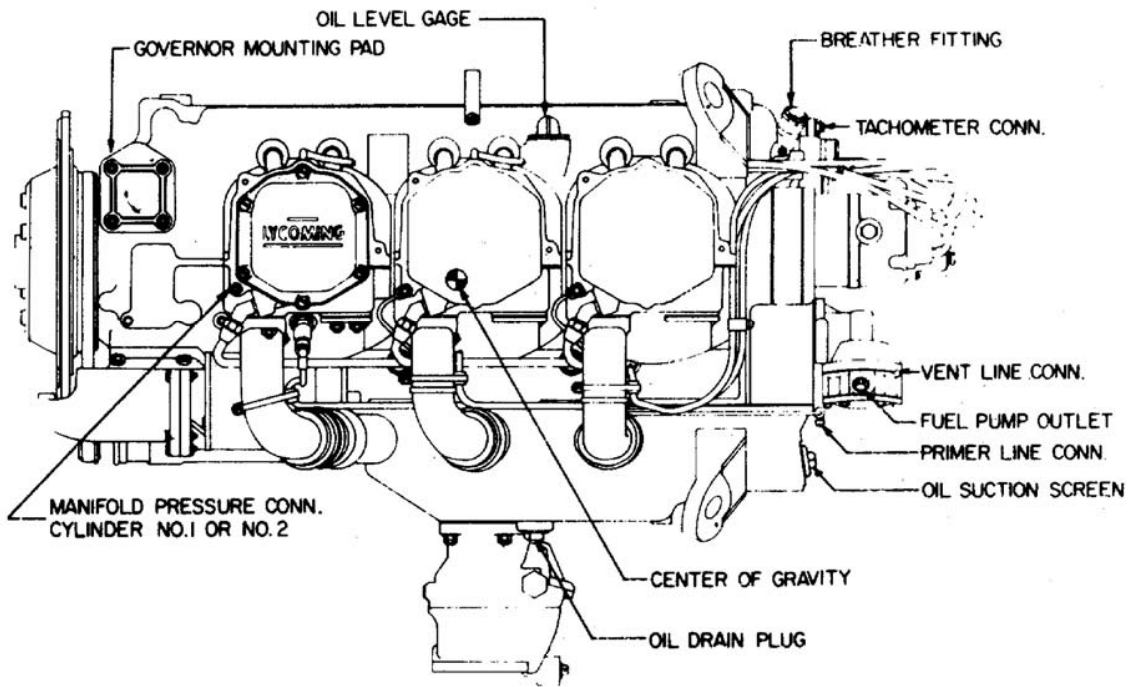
Installation Drawing – Left Side View – O-540 Series
